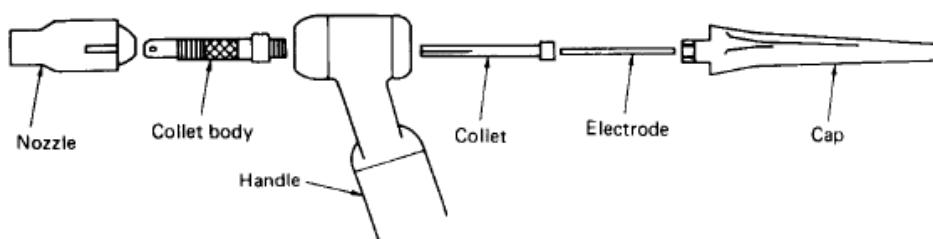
Schematic showing exploded view of key components comprising a GTAW manual torch
